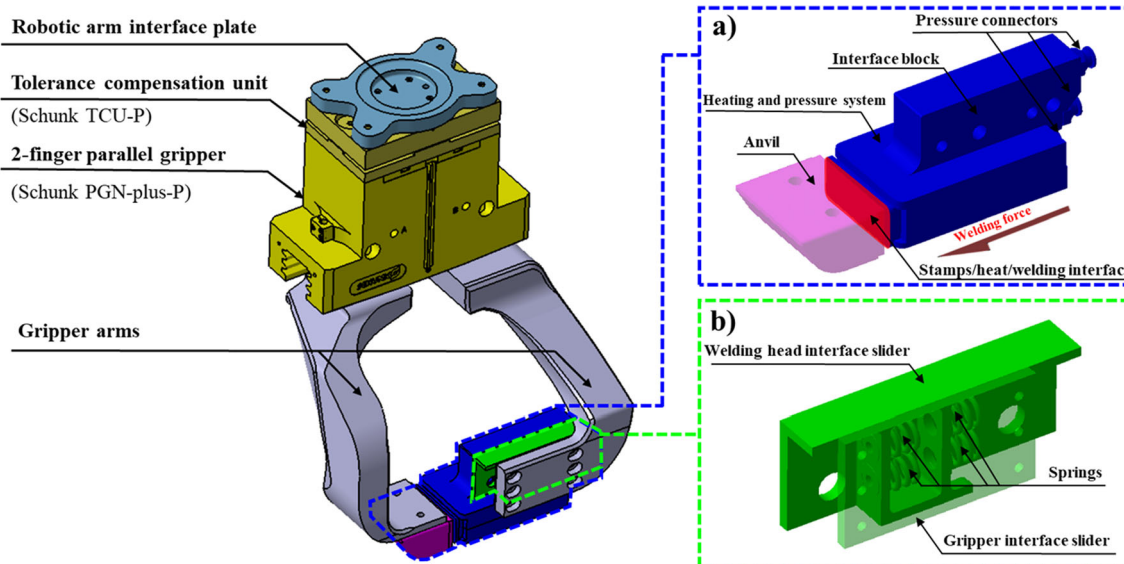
Short welds gripper and welding system showing (a) the conduction short-short welds head and (b) the spring pack solution
